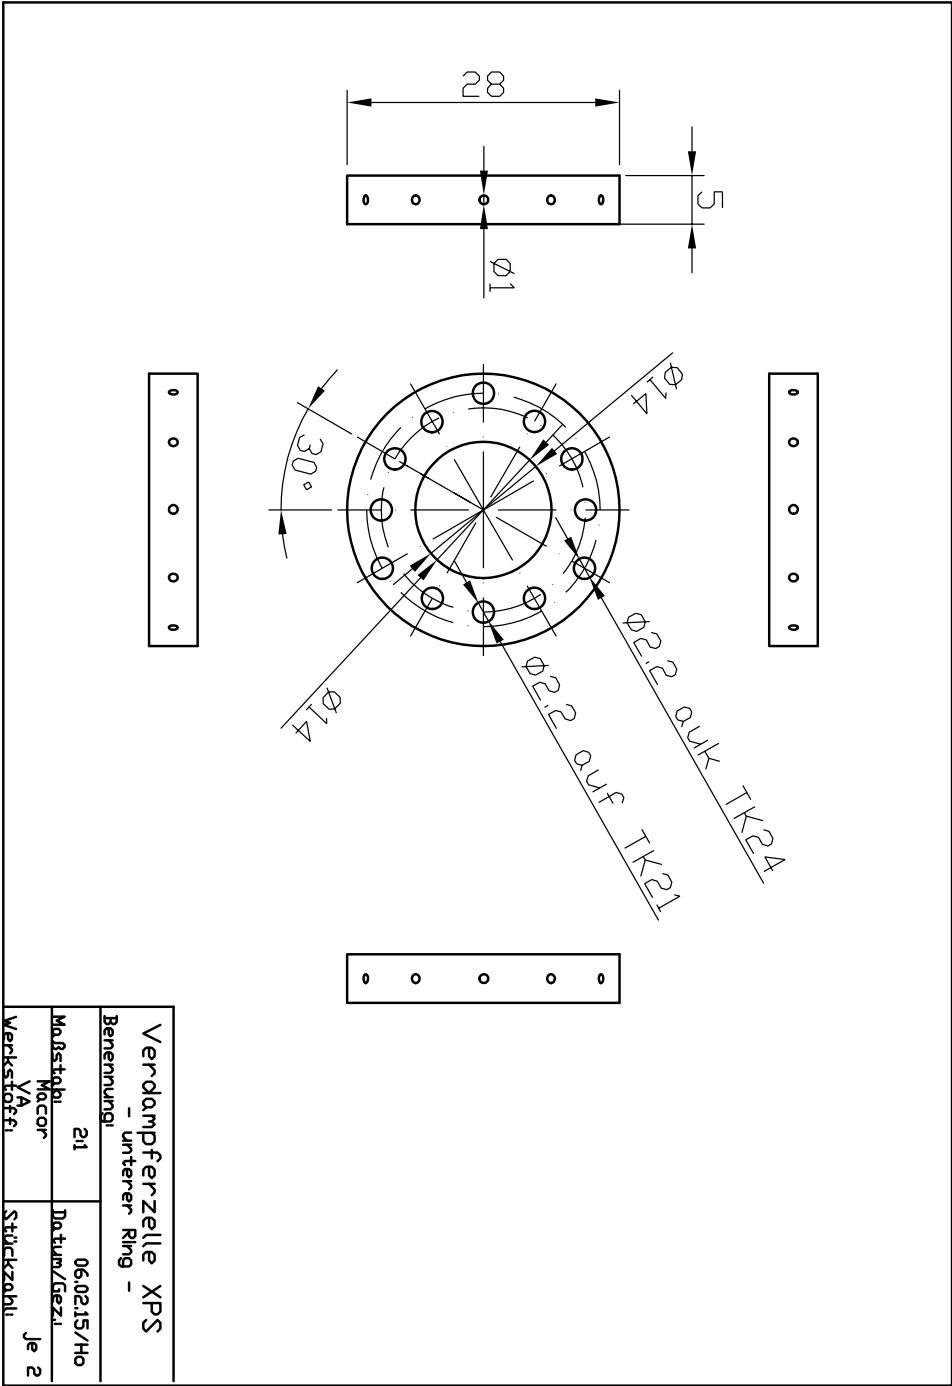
Stainless-steel ring that is used to hold the structure.
